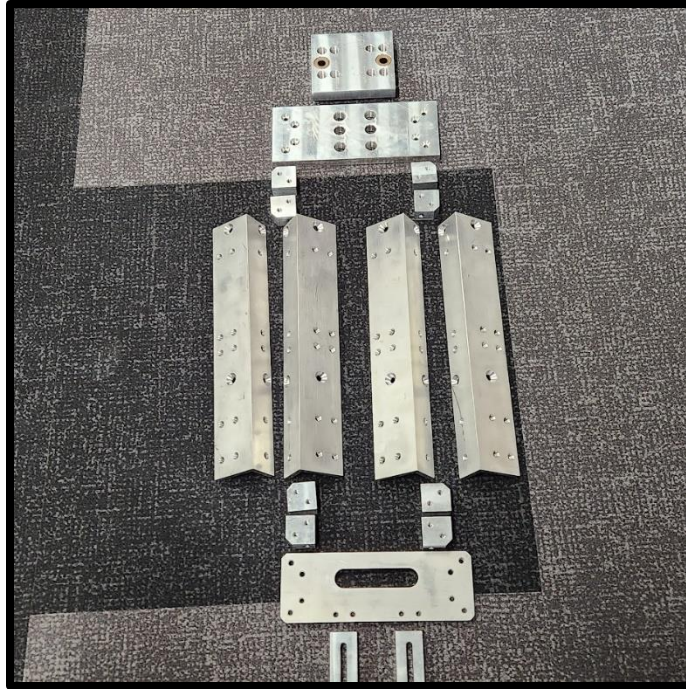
Frame parts for NM 2508-2511 mandrel – 3 similar sets of parts were made for the frame of all 3 Retail Pack mandrels. All threading, countersinking and machining operations were done by hubs.com
